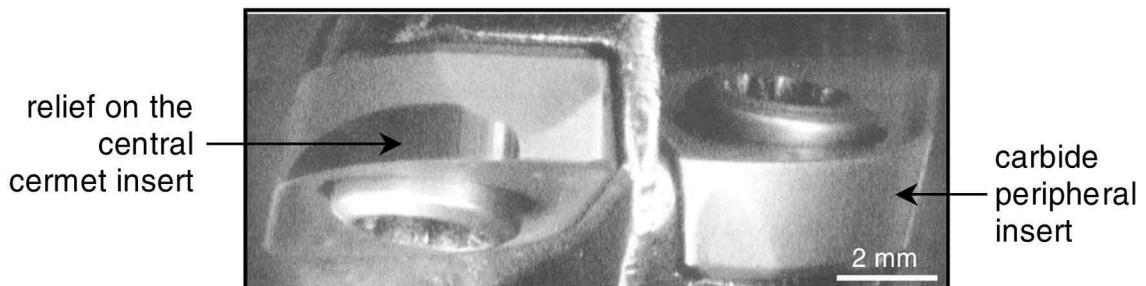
End view of the ball nose endmill, showing the relief provided on the central cermet insert to transfer
